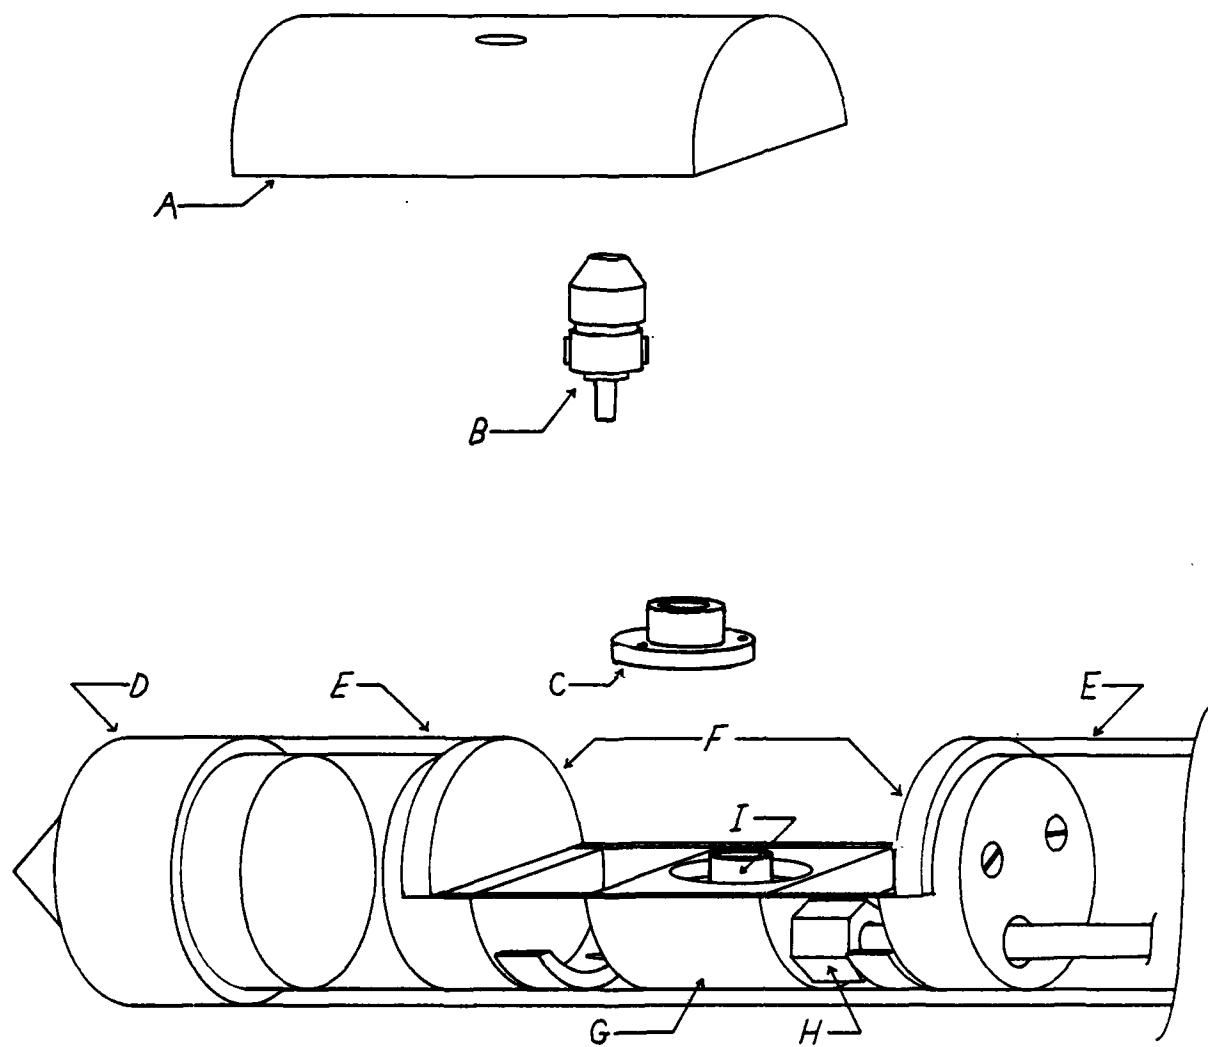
Perspective view of the aerosol sampling probe. The nomenclature is as follows: (A) probe head, (B) Millipore filter holder, (C) filter retainer ring, (D) probe end plug, (E) probe body, (F) probe head supports, (G) probe tailpiece, (H) Swagelok connector for vacuum hose, (I) vacuum mating piece.
